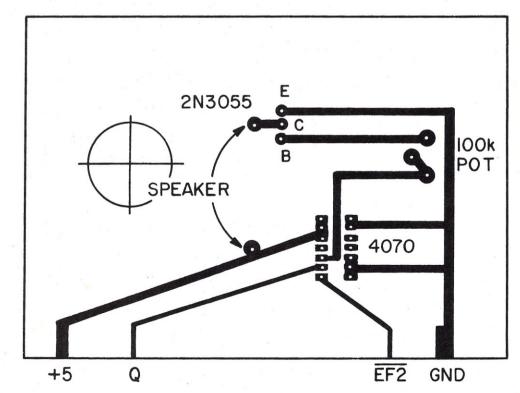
Printed circuit pattern for the reverse side of the board. A hole is drilled where indicated for mounting the speaker.
